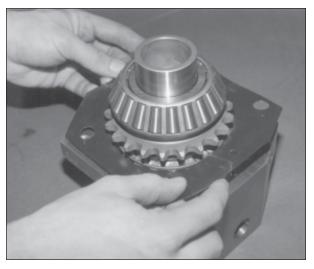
Place gear box shim on bottom plate and align bolt holes.
